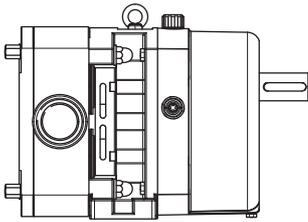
Incomplete machine: pump without motor, coupling, or base frame illustrated using the FL 100
